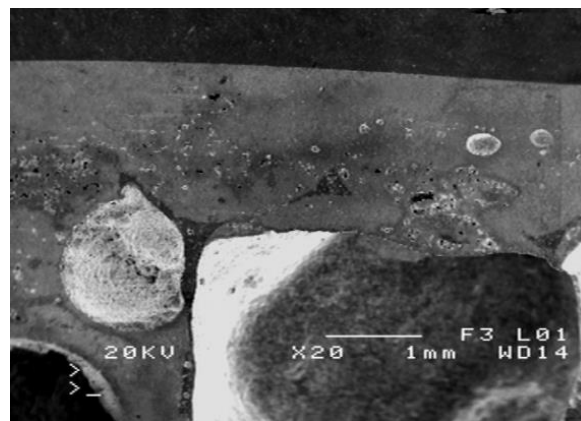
Al foam - Al sheet brazed joint, ZnAl122 brazing metal, macro- and micro- image. The microscopic image reveals melting and mixing of foam cell walls with filler metal and a visible pore not filled with liquid solder.
